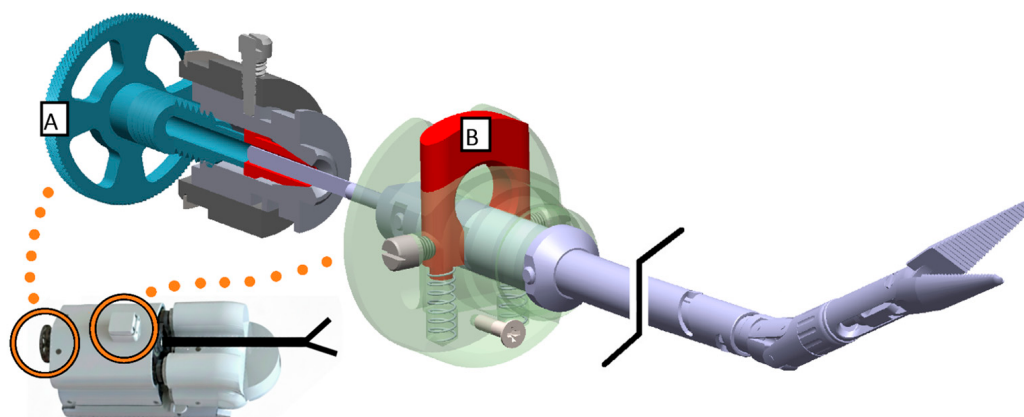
The inner coupling mechanisms of the SATA gearbox. When the blue collet screw at A is tightened into the base, it pushes the red collet gripper. The collet gripper is pushed along a slanted edge and clamps down on the inner shaft of the SATA instrument [18]. At B we see the shaft decoupling button in red. The spring-loaded button engages with the shaft to transmit rotational motion for the actuation of the SATA instrument. Additionally, the button locks the shaft in the SATA gearbox, and pressing it disengages the lock, allowing the shaft to be extracted [19].
